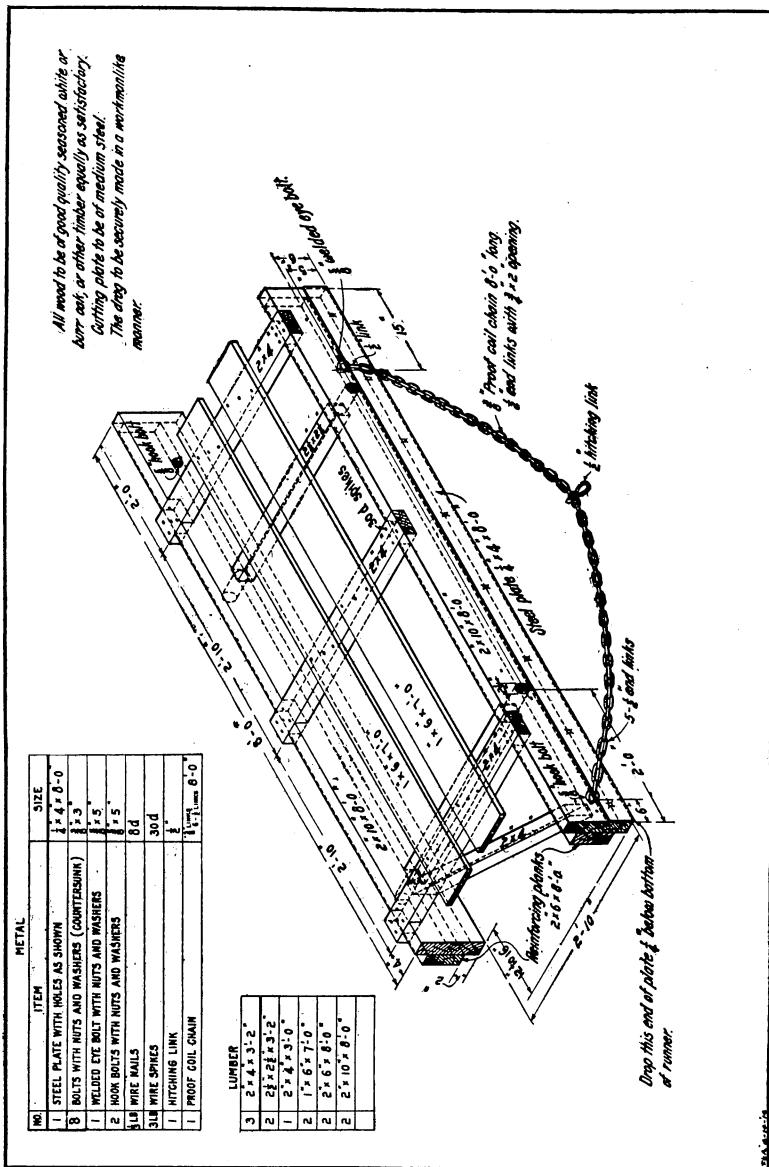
Detail drawing showing typical construction of road drag built of sawed lumber.
